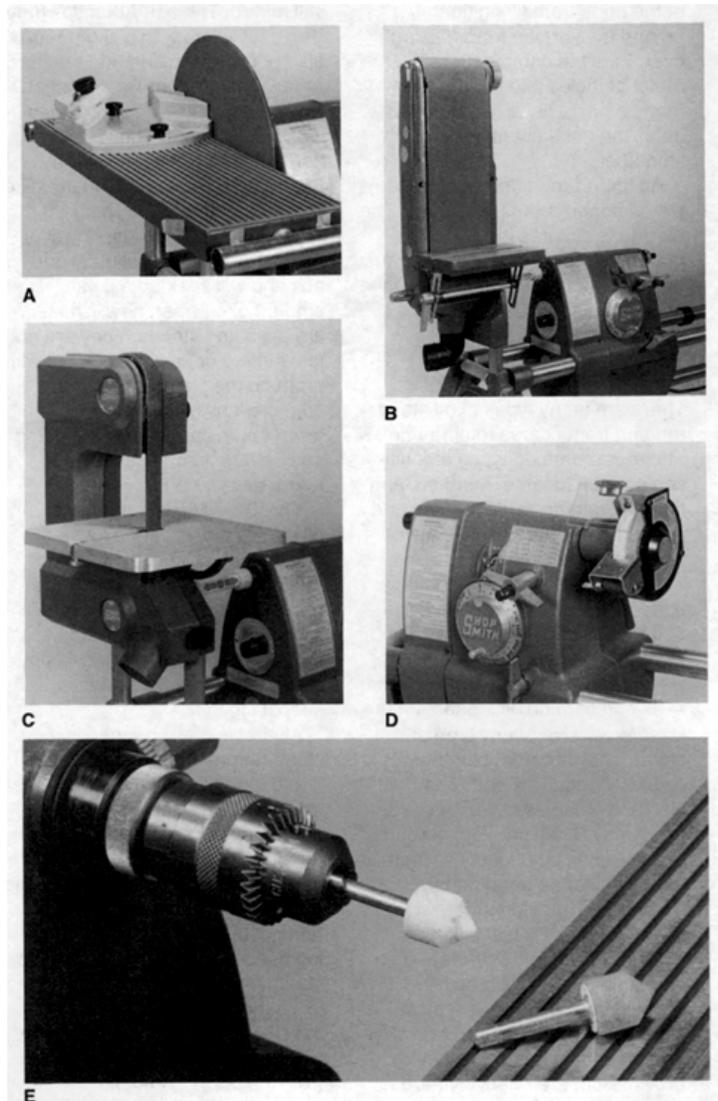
The machines and accessories used for grinding are: (A) disc sander, (B) belt sander, (C) strip sander, (D) grinding wheel, (E) specialty grinding stones, and the sharpening guide. The sharpening guide which is used with the disc sander, belt sander and strip sander is shown with the disc sander.
